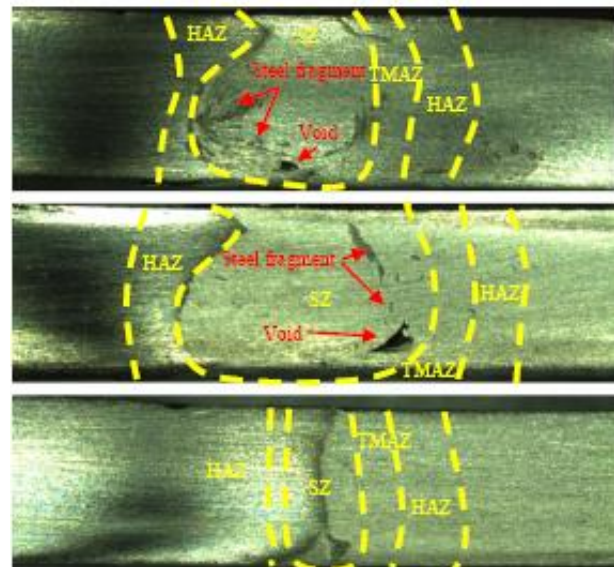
Cross-sectional view of (a) AA1100-A441 AISI, (b) AA5050-A441 AISI and (c) AA6082-A441 AISI joints.
